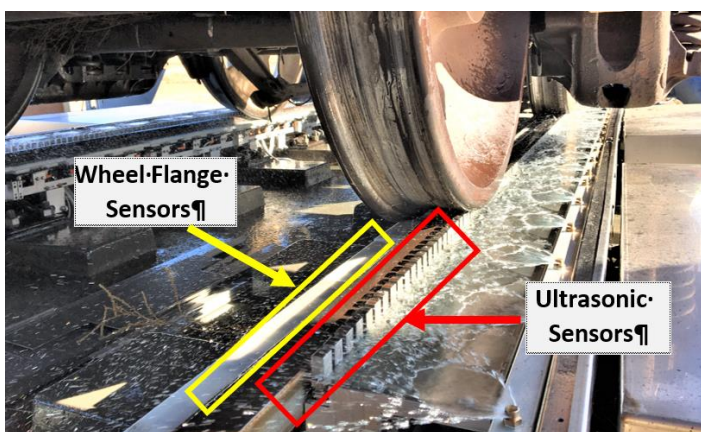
Wheel flange sensors and outboard ultrasonic probes in the standard gage section
